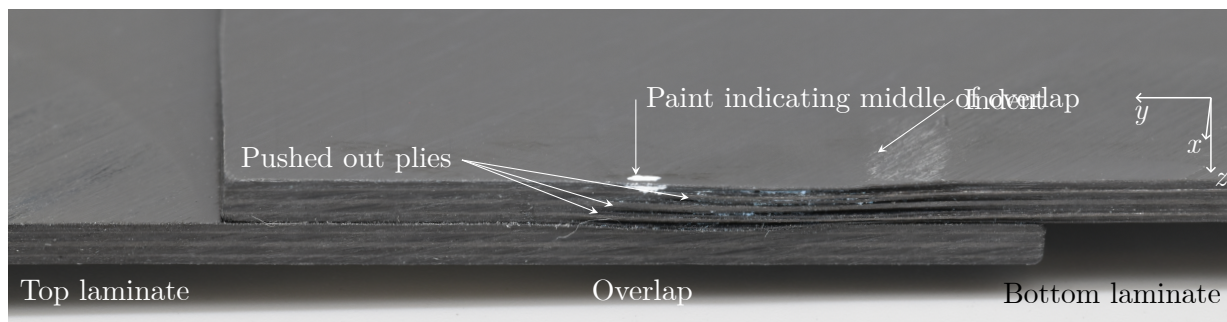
Close-up of an edge effect at the end of the weld overlap of a high-power, high-pressure weld (B2L2), imaged from the bottom.
